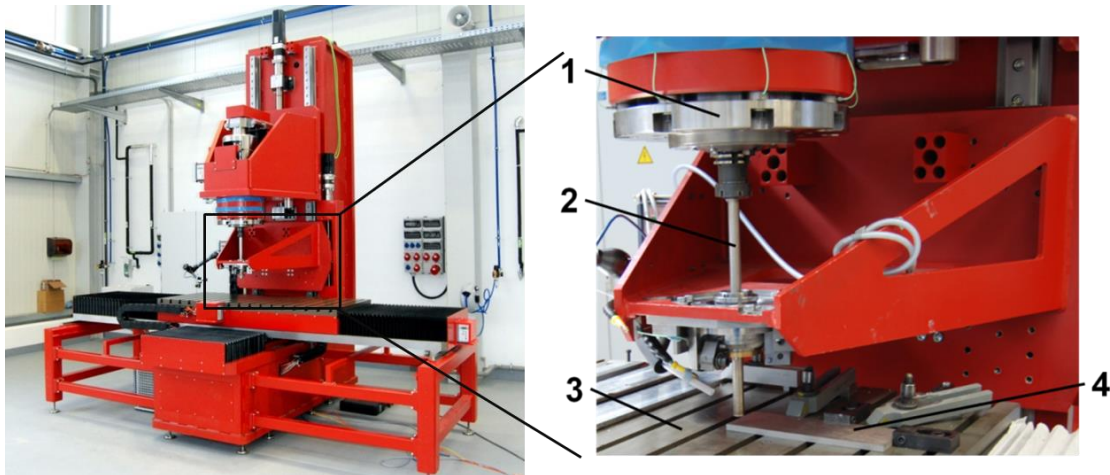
Friction surfacing machine. 1) Spindle; 2) consumable rod; 3) moving table; 4) substrate (Helmholtz-Zentrum Geesthacht).
